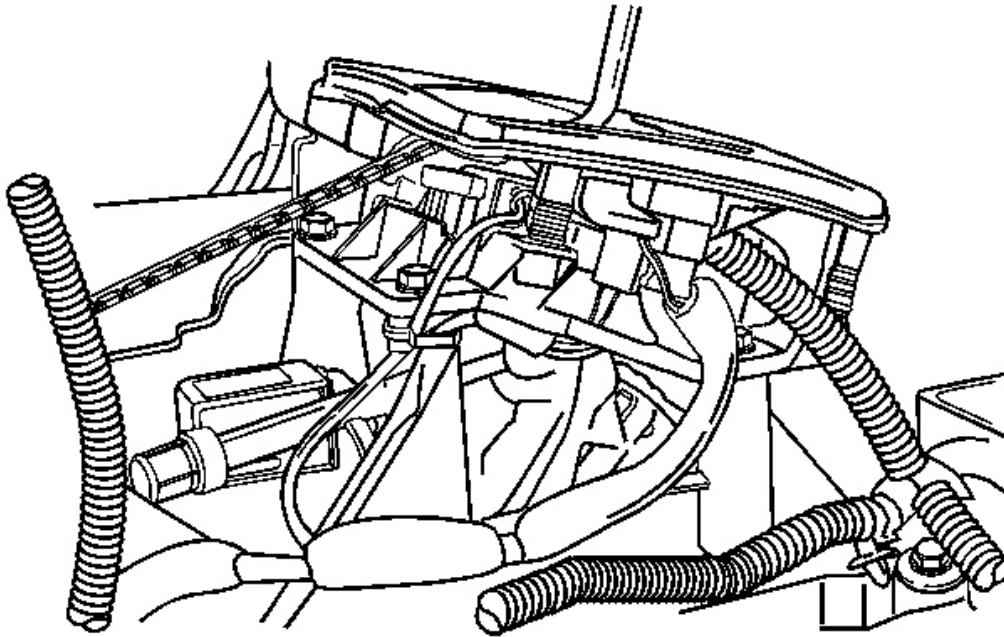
Shift Select Cover, Shift Select Housing & Connectors
